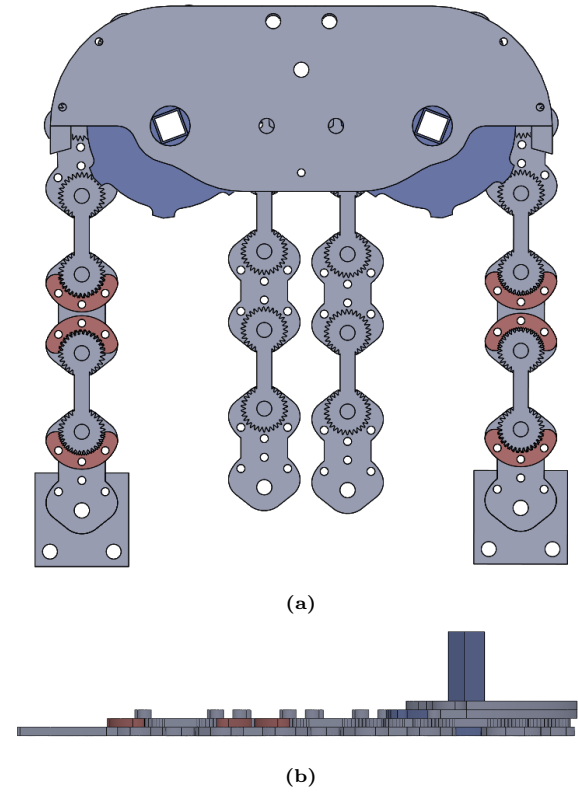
Top view (a) and side view (b) of prototype I, color-coded by red and blue, representing locking plates and drive system respectively.
